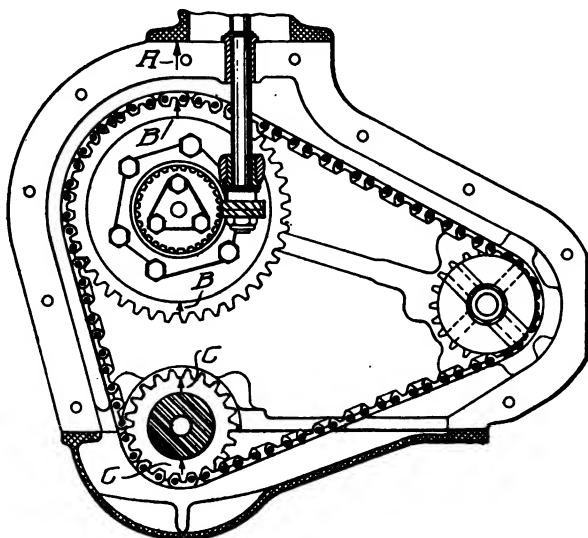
Silent-Chain Drive for Packard Twelve, Showing Method of Marking
